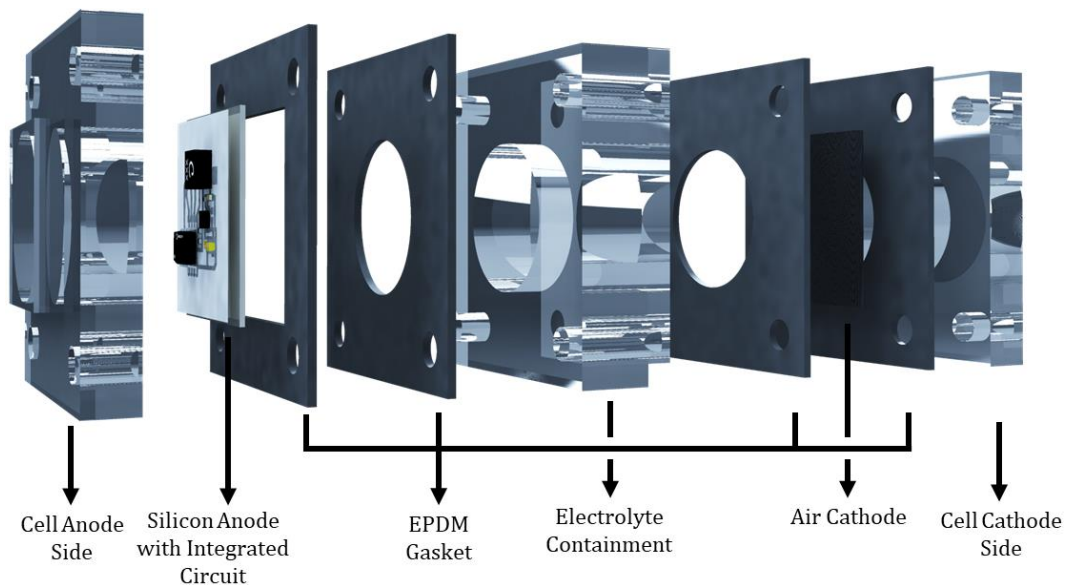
Assembly of the PCB/Si-air battery with the casing.
